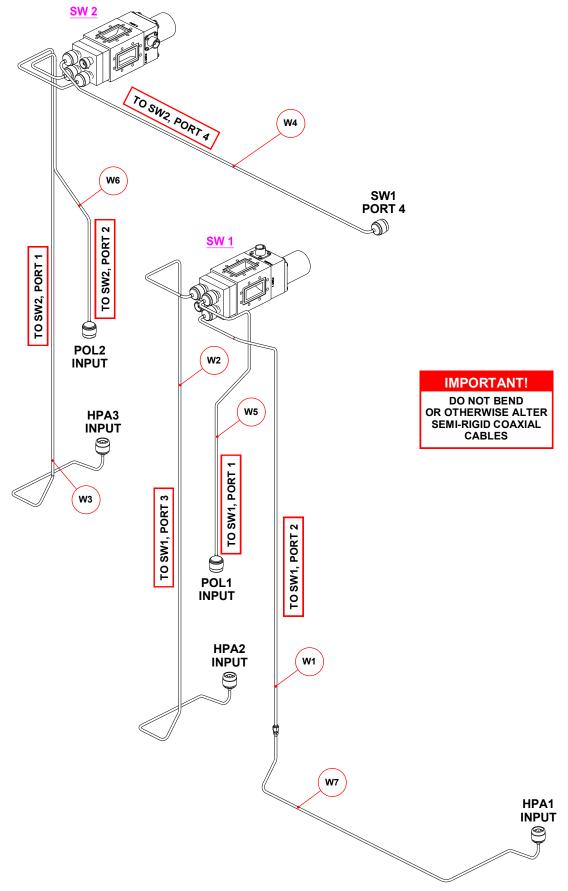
Installation, Coaxial Cables for C-Band Systems (typical)
